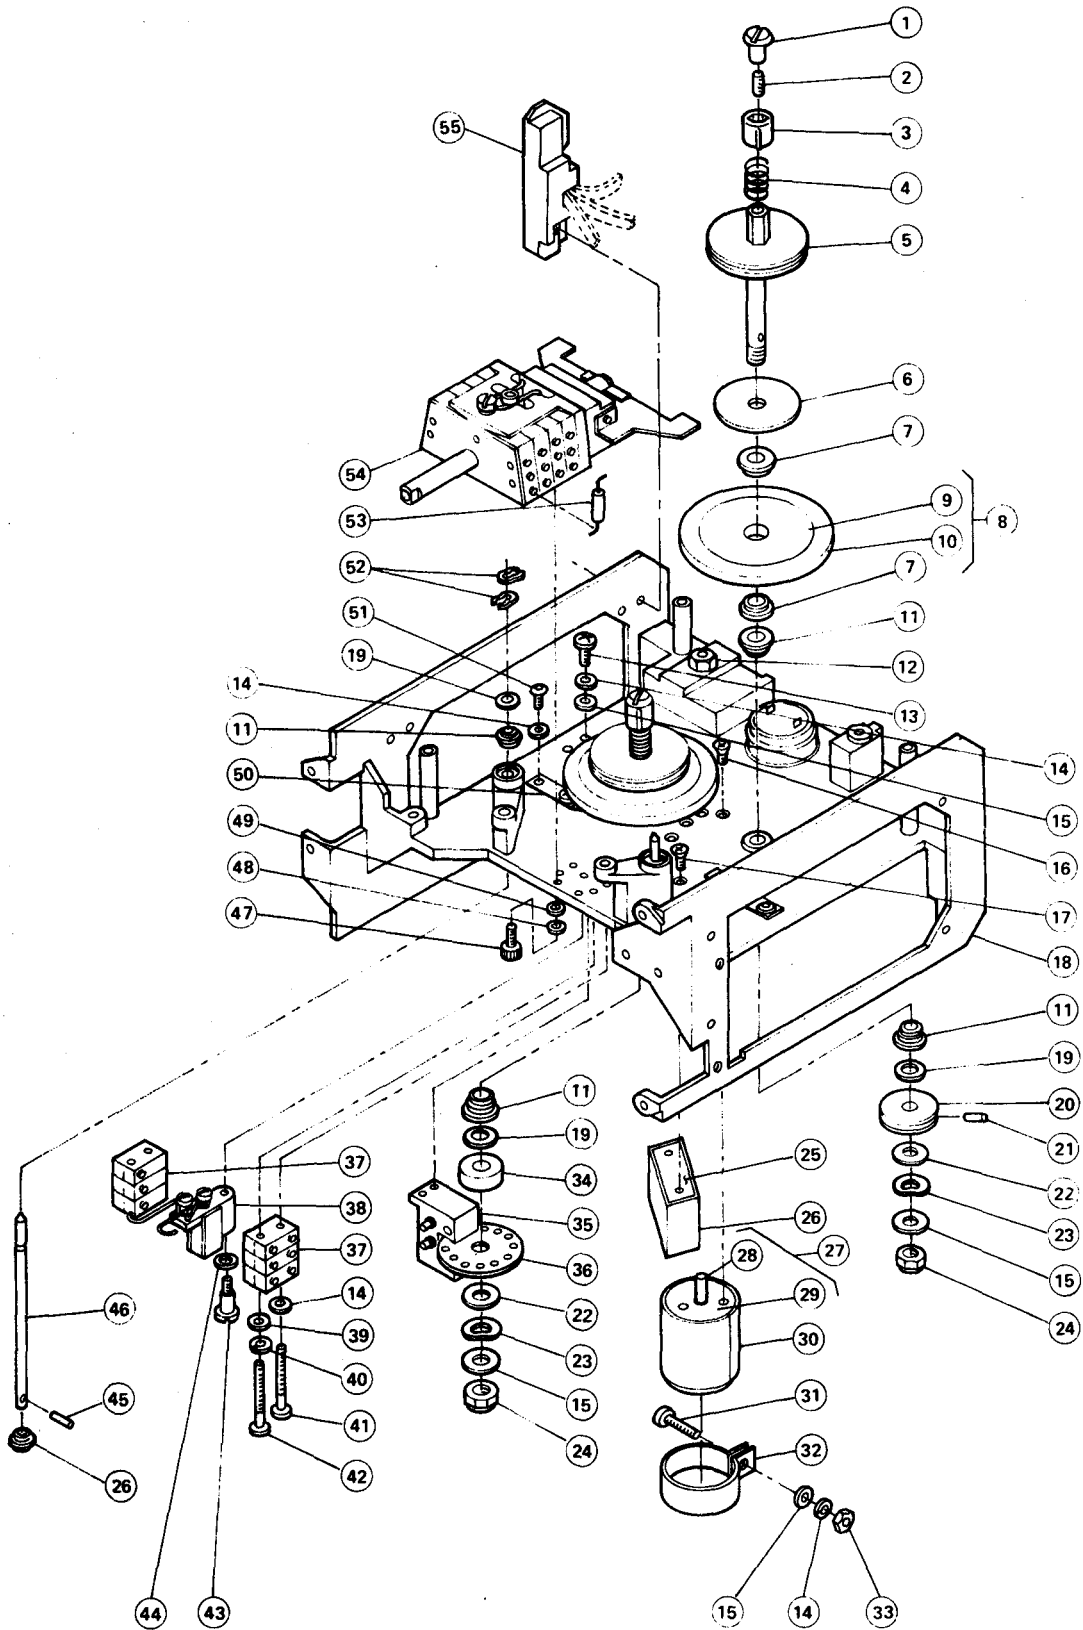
Magnetic tape transport subassembly (sheet 1 of 2)
